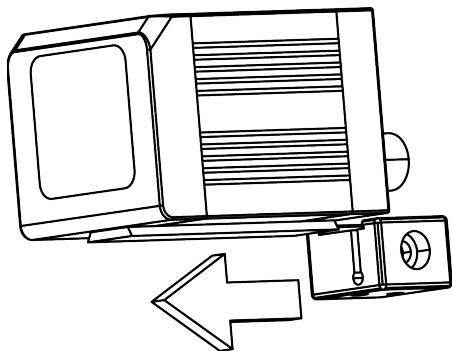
Assembly VISOR® - Mounting bracket MK 45
